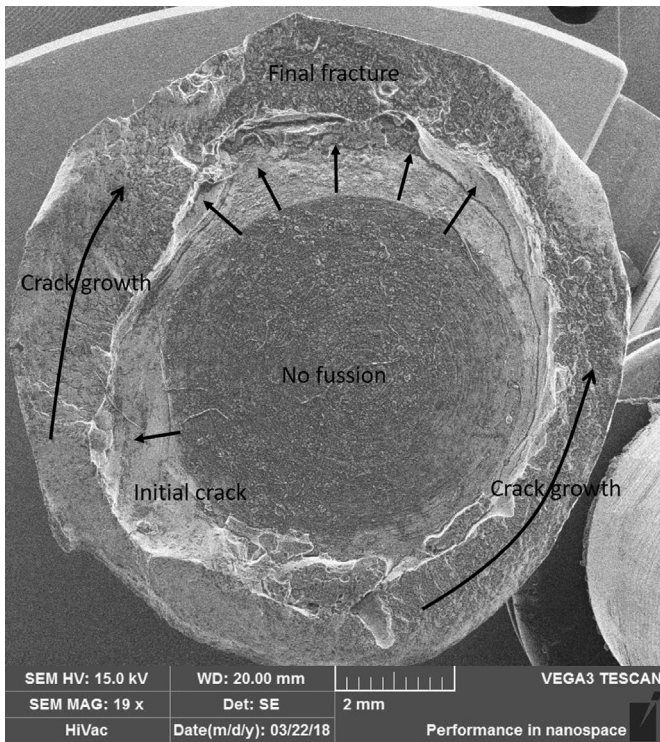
Fracture surface of fatigue test for air weld.
